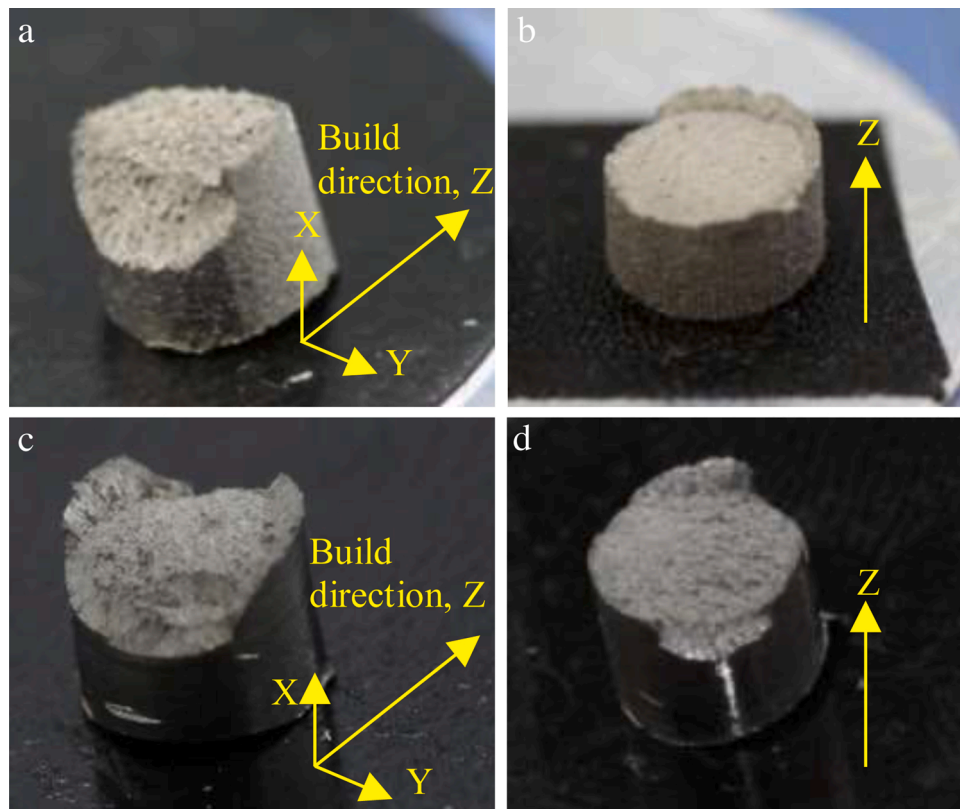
Typical fracture surfaces of (a) as-built horizontal sample, (b) as-built vertical sample, (c) machined horizontal sample and (d) machined vertical sample.
